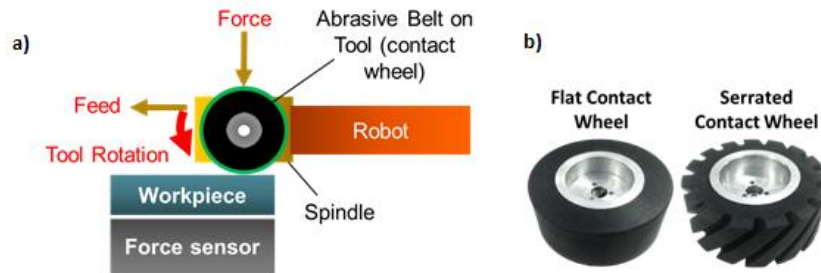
a), Representative setup for material removal experiment and b), contact wheels
